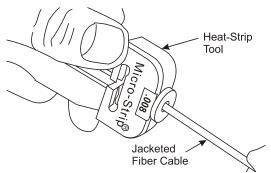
Heat-Strip Tool–Jacketed Fiber Cable
